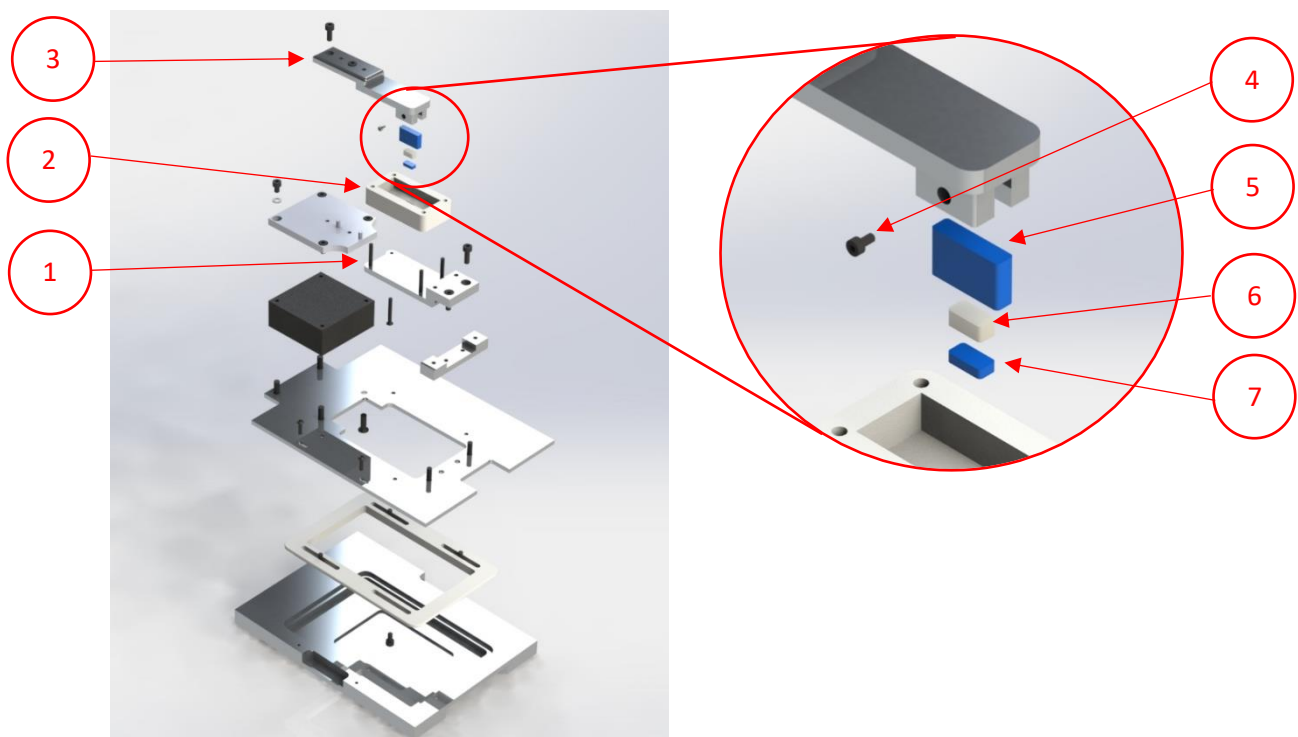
Design of shear system of mechanical cell loading device (exploded view) and close-up of substrate for shear loading
